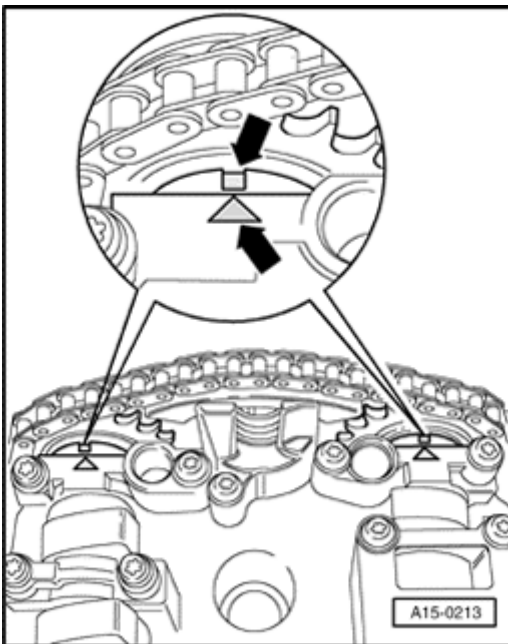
Positioning Camshafts To TDC Cyl. 3
